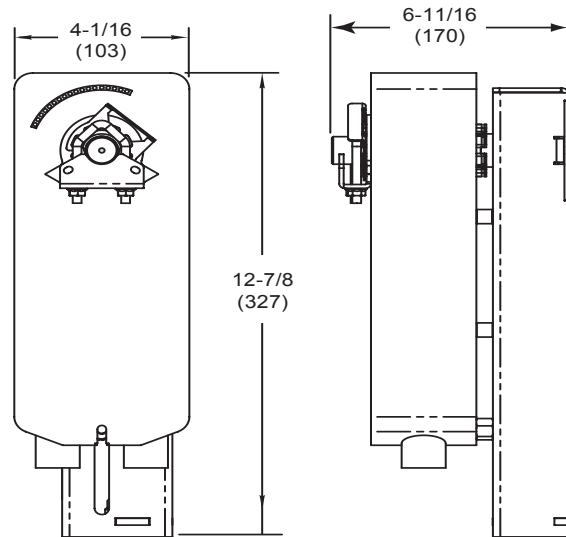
Mx41-715x-230 Actuator/Linkage Assembly
